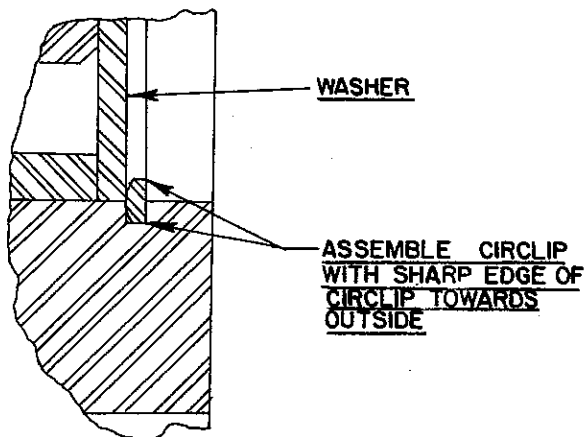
Assembly of Washer and Circlip in Counterweight
